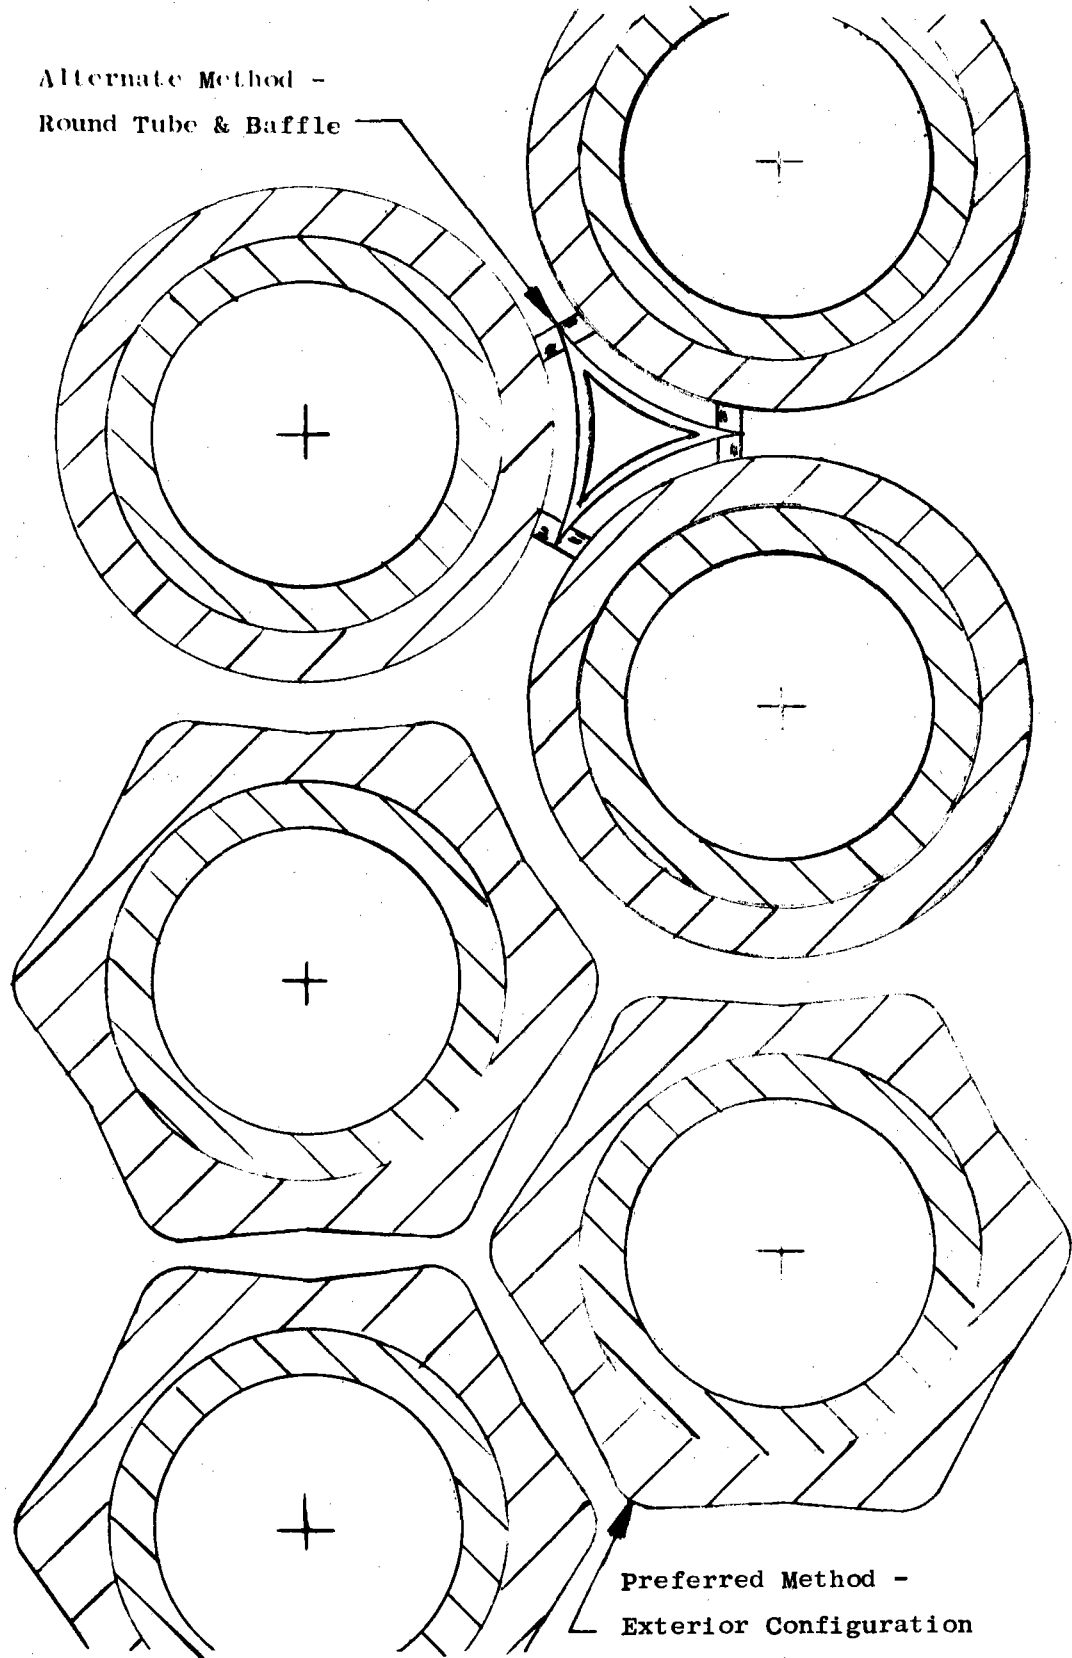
Section Through Reformer Tube Bundle Showing Intertube Flow Blockage.
